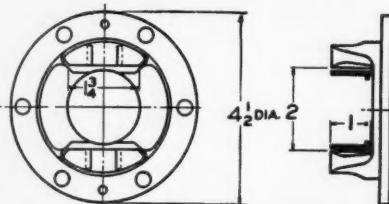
Piece for which the fixture shown in Fig. 4 was designed.
